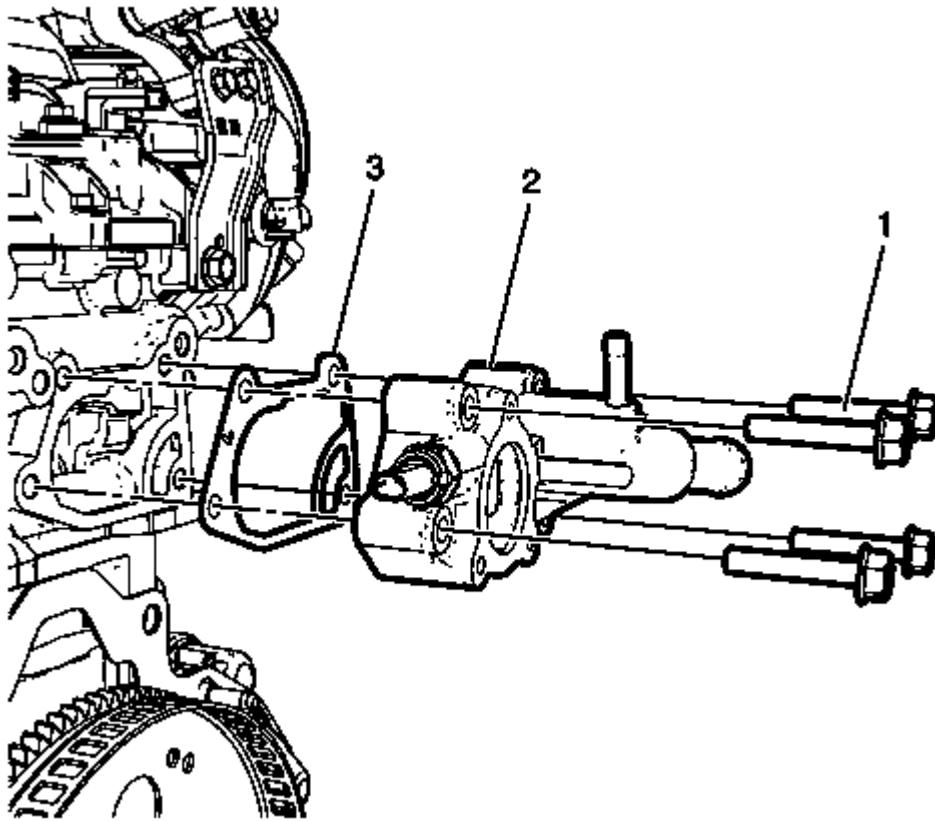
Engine Water Outlet Adapter Housing Bolts
